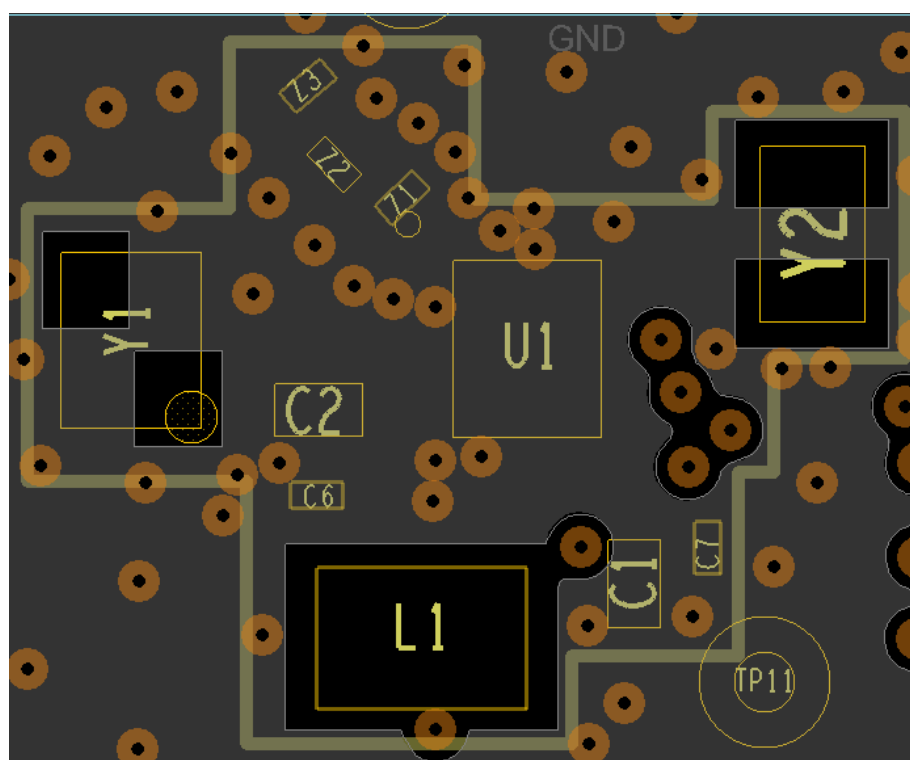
WLCSP17 PCB Placement and Routing – GND plane - INT1 Layer
